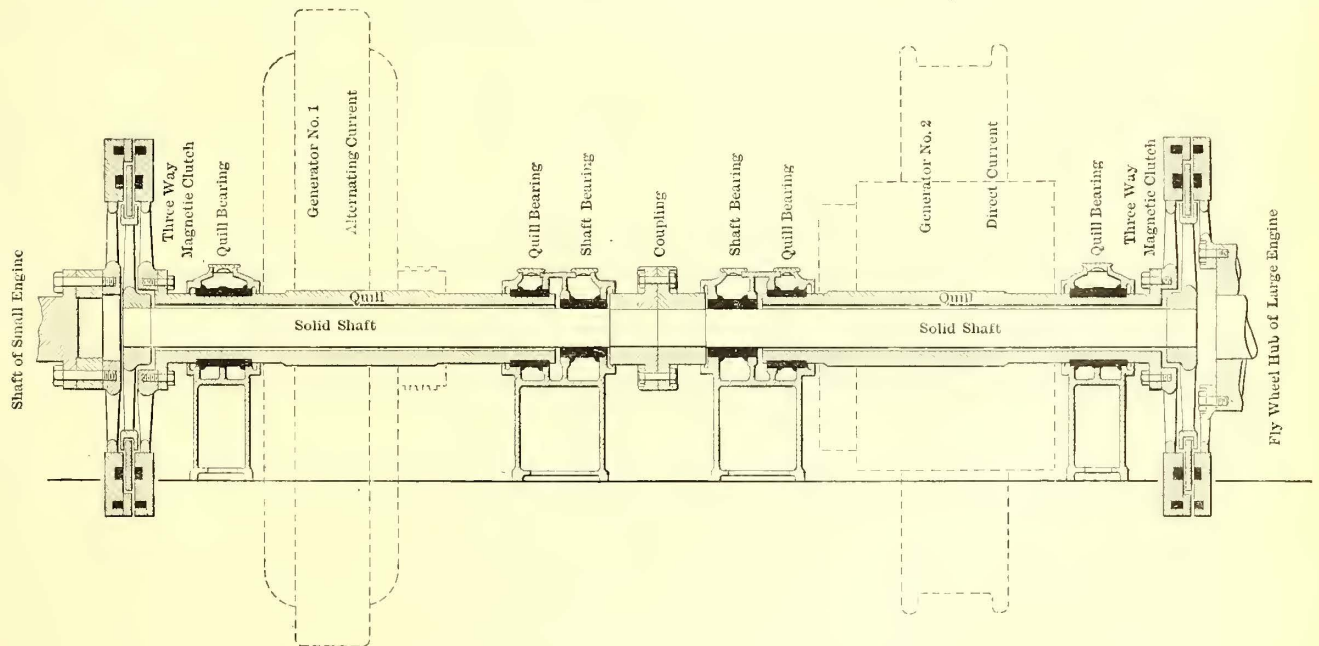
SECTION THROUGH SHAFT BEARINGS, CLUTCHES AND COUPLING
